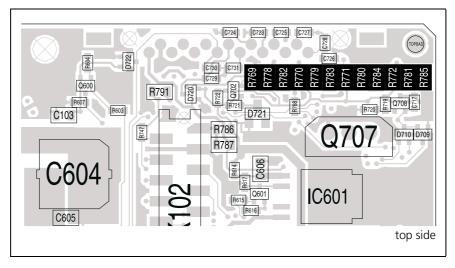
shows the positions of these placeholders on the main board assembly.
